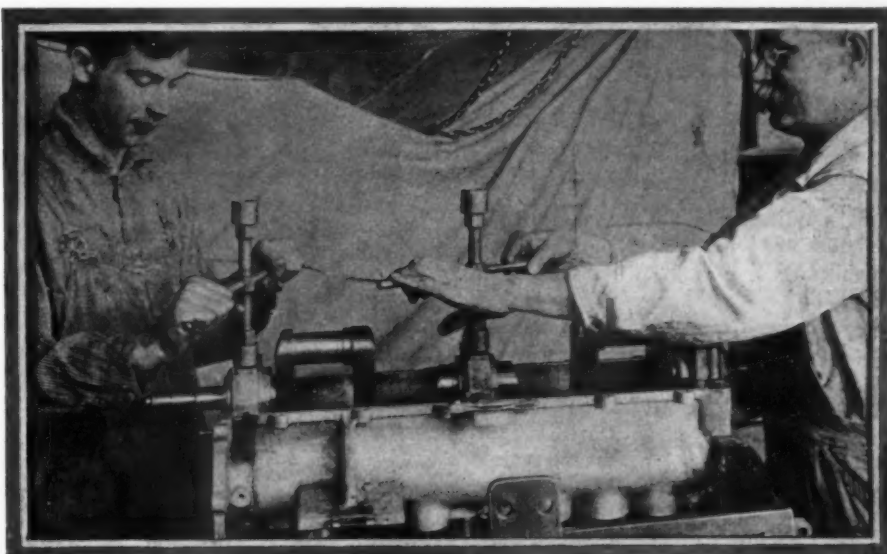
Tightening up the bearings during scraping must be carried out with great care and uniformity, and it is necessary to use socket wrenches for the purpose
